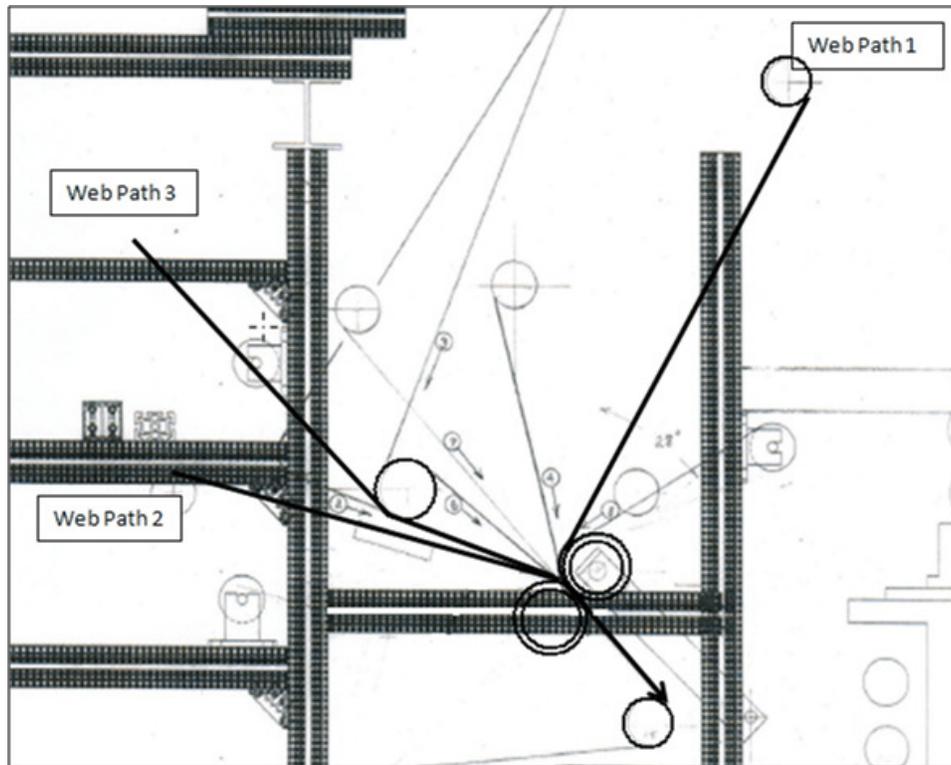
Web Wrinkling Trial Web Path Configurations, West Elevation
